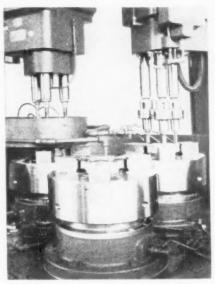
Air operated drill press chucking equipment on special high production machine. Note that air cylinder is built into base of power chuck.
